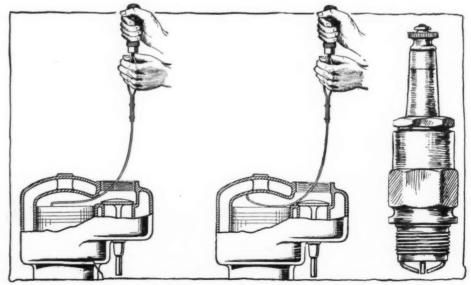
Success tool for removing the carbon from cylinder and piston head.
